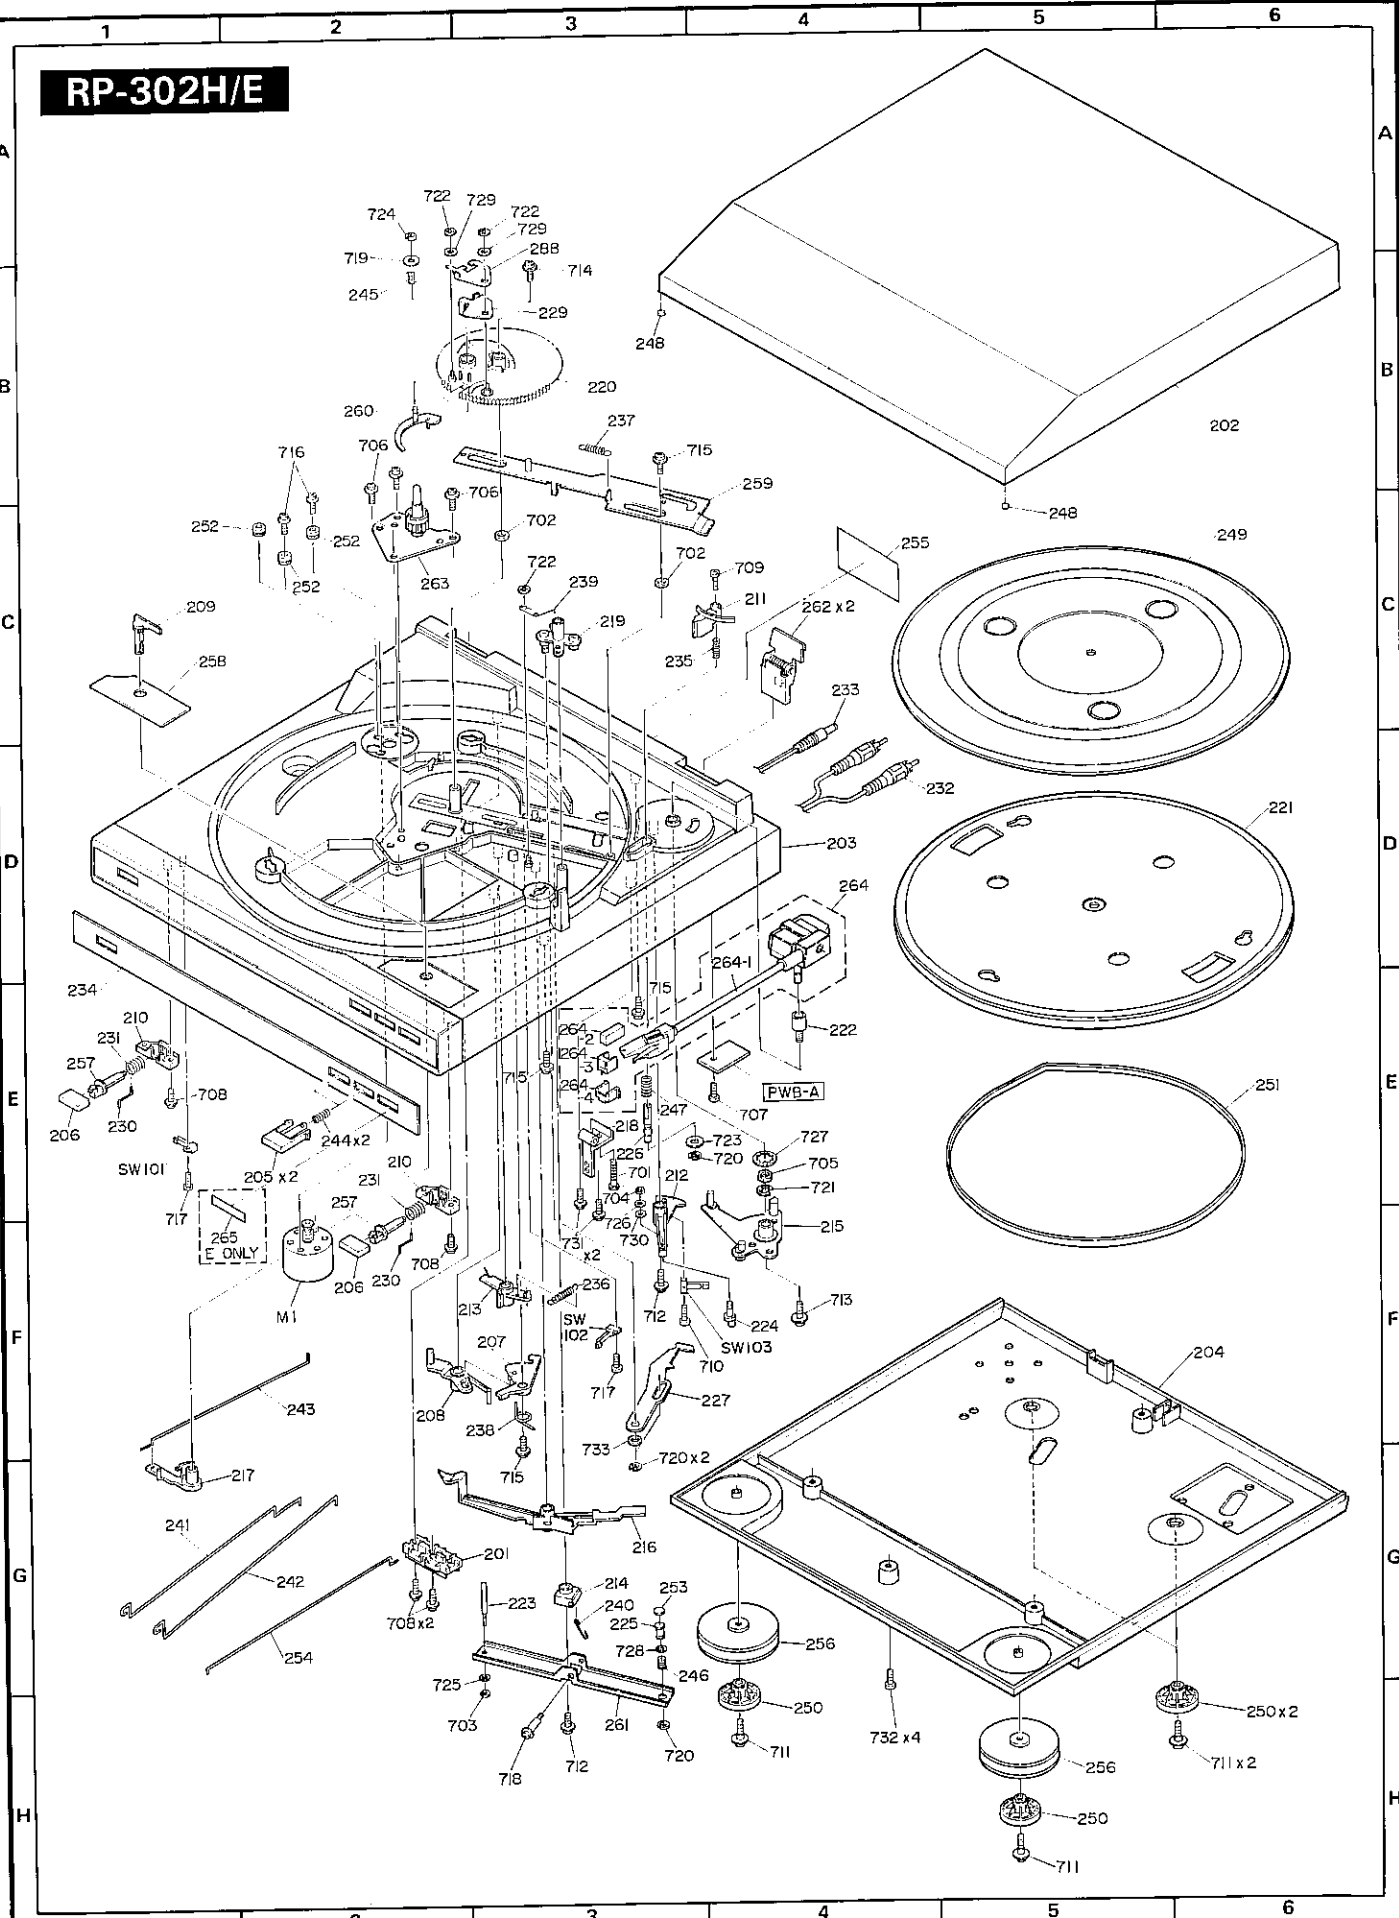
PLAYER MECHANISM EXPLODED VIEW
